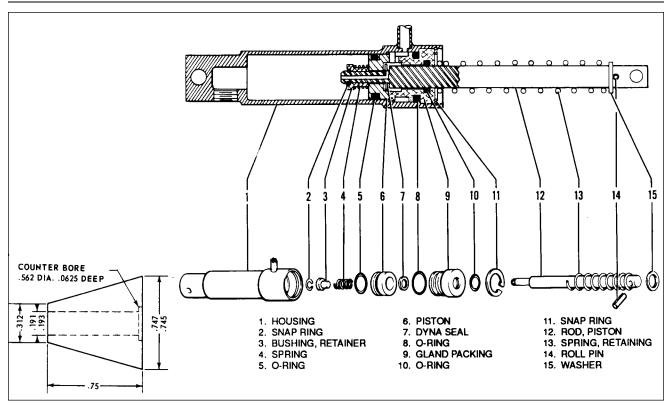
Brake Master Cylinder (Hand/Parking Brake)
